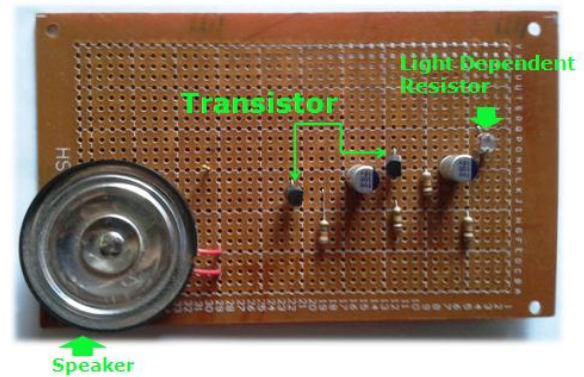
Laser torch based voice receiver circuit of our project on PCB board.
